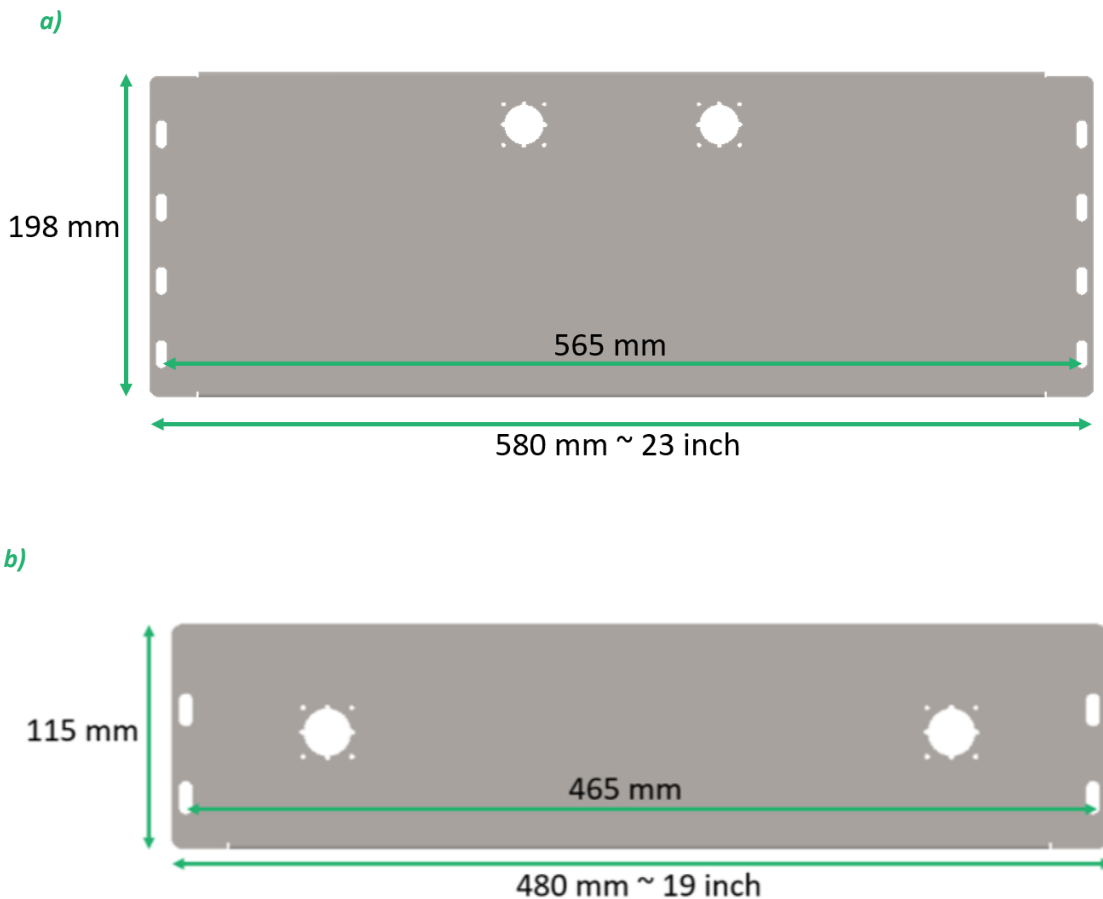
Dimensions and placement of the front plate for the a) Solitek and b) Siro module
